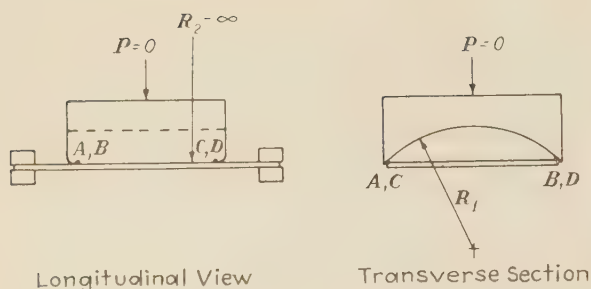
FORMING OF CONVEX CYLINDRICAL PART
